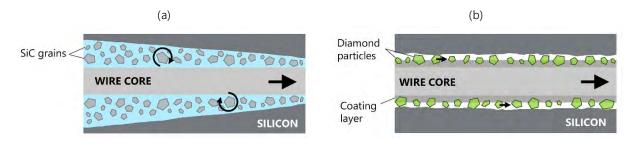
Illustration of the cutting mechanisms involved in (a) slurry and (b) DWS technique
